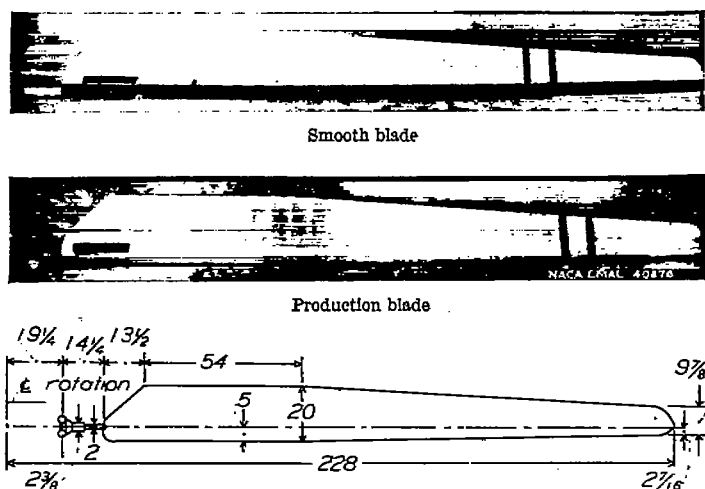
Rotor blades tested. Lower surface shown. (All dimensions given in inches.)
